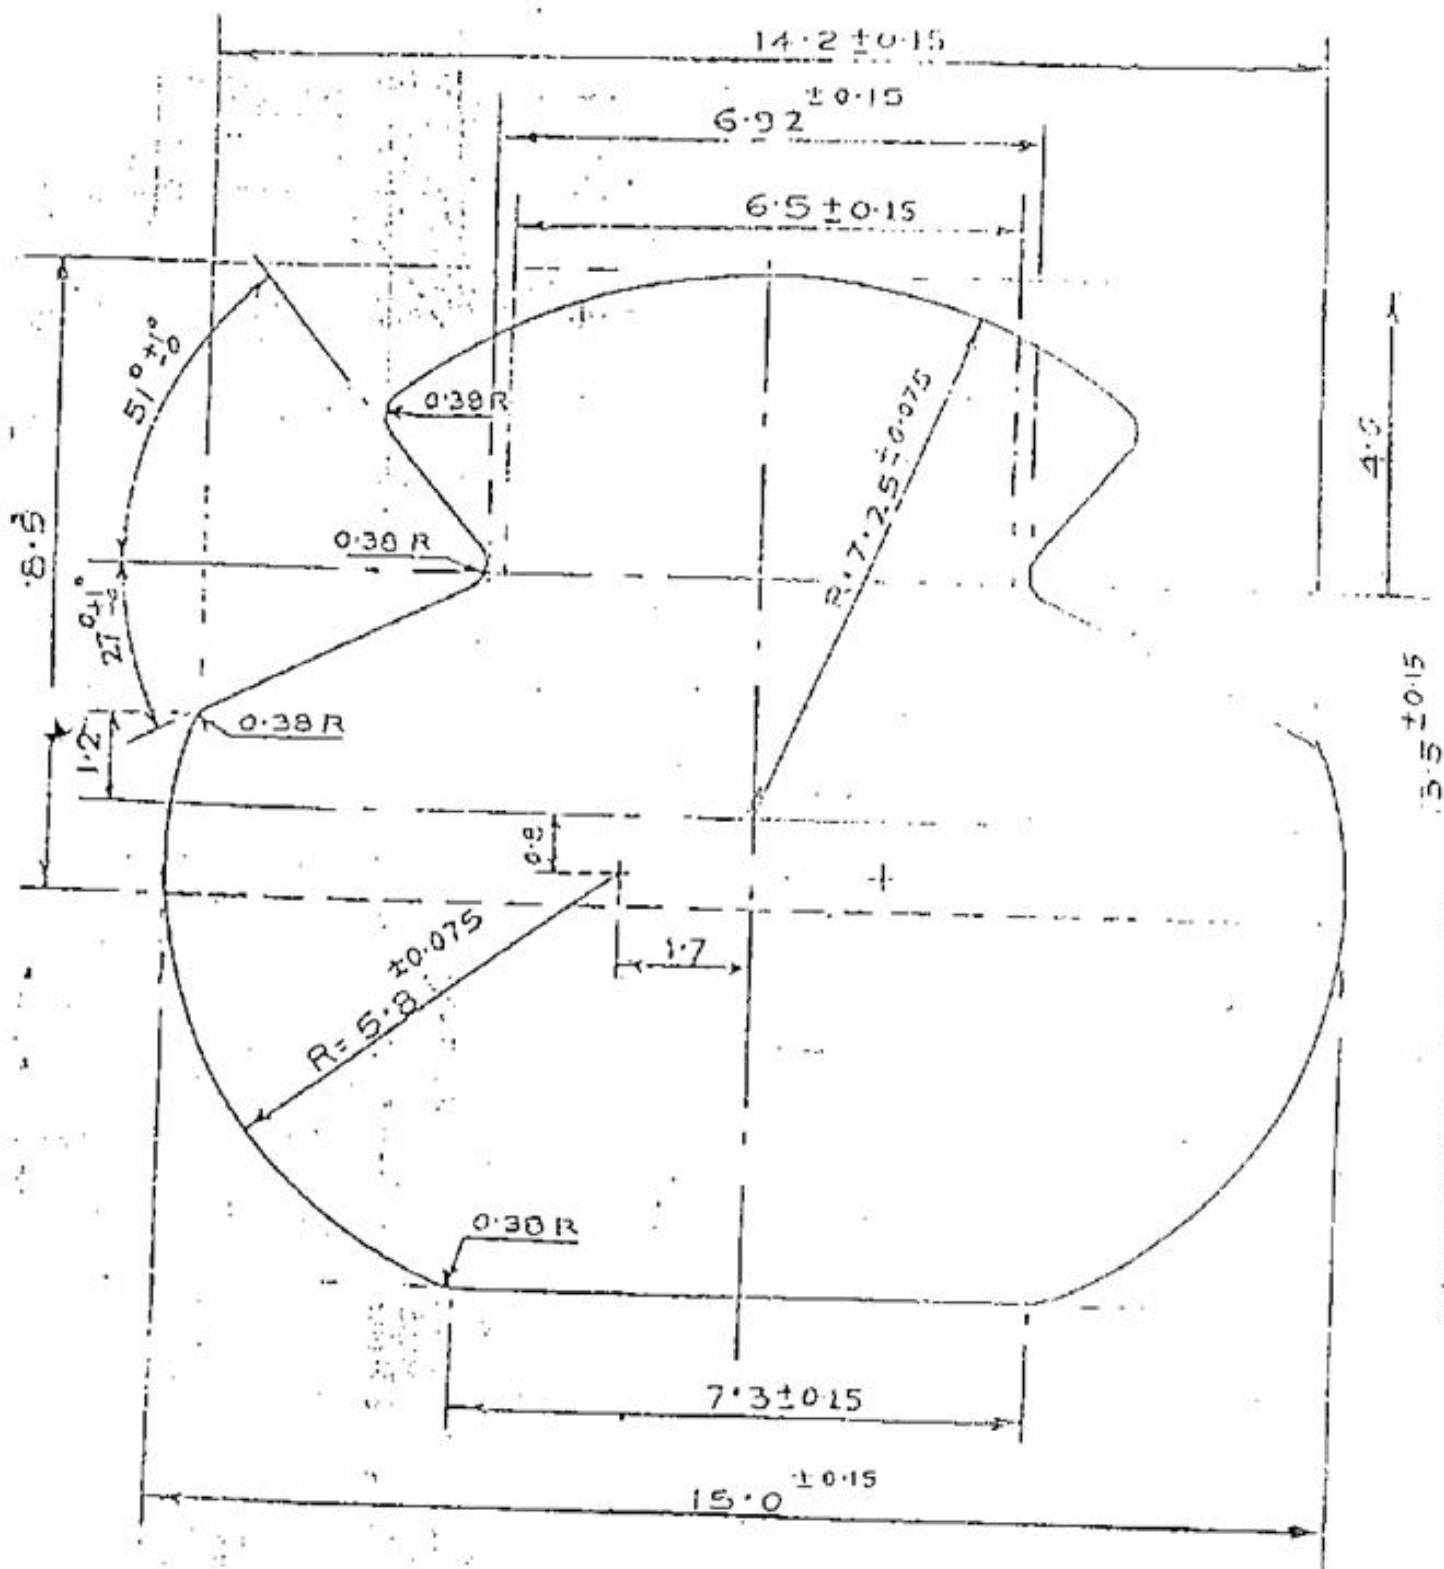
SPECIAL CALIPER FOR CHECKING CONTACT WIRE
